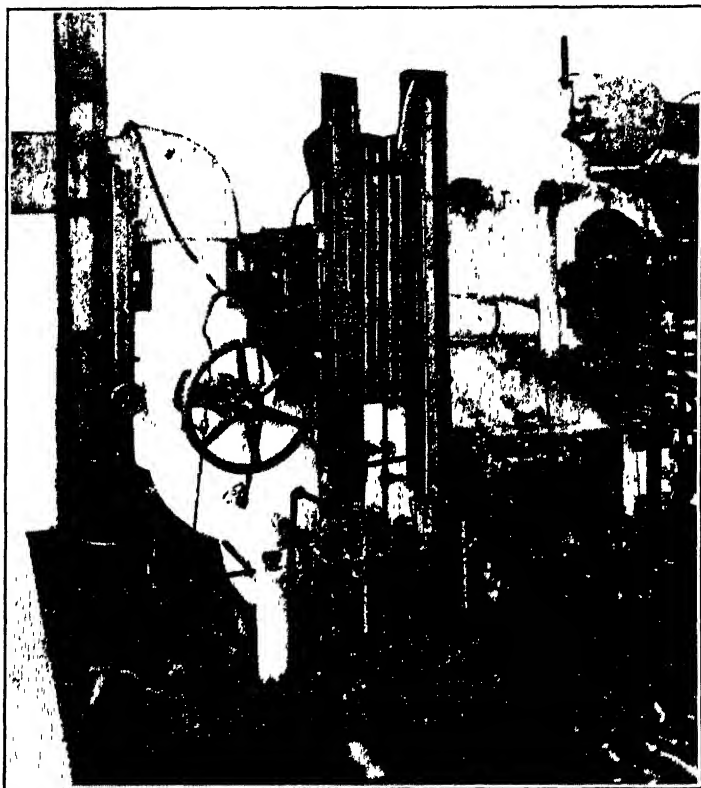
BACK VIEW OF NOZZLE-TESTING MACHINE
